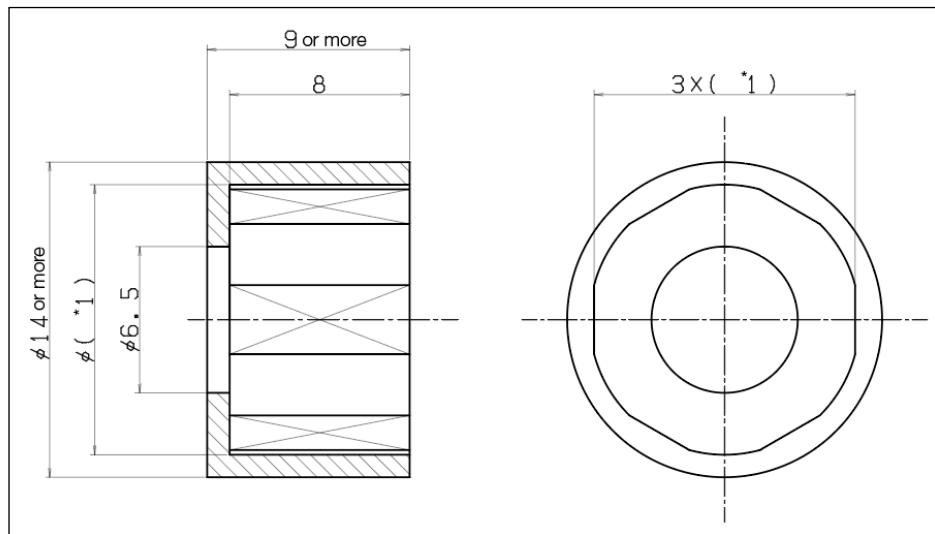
Design 1-2 of Wide One-Way Clutch Fitting Section
